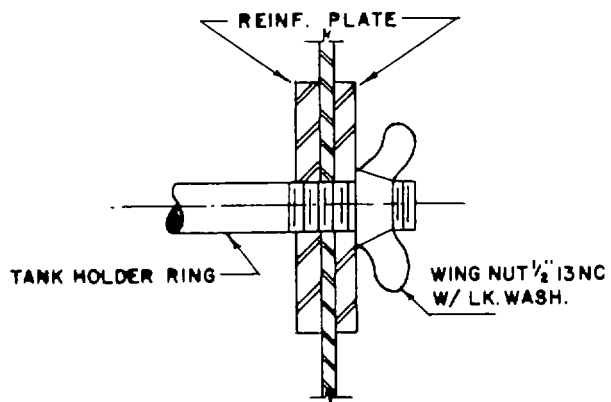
Tank mounting ring, bottom, 9 1/8 inch diameter.
